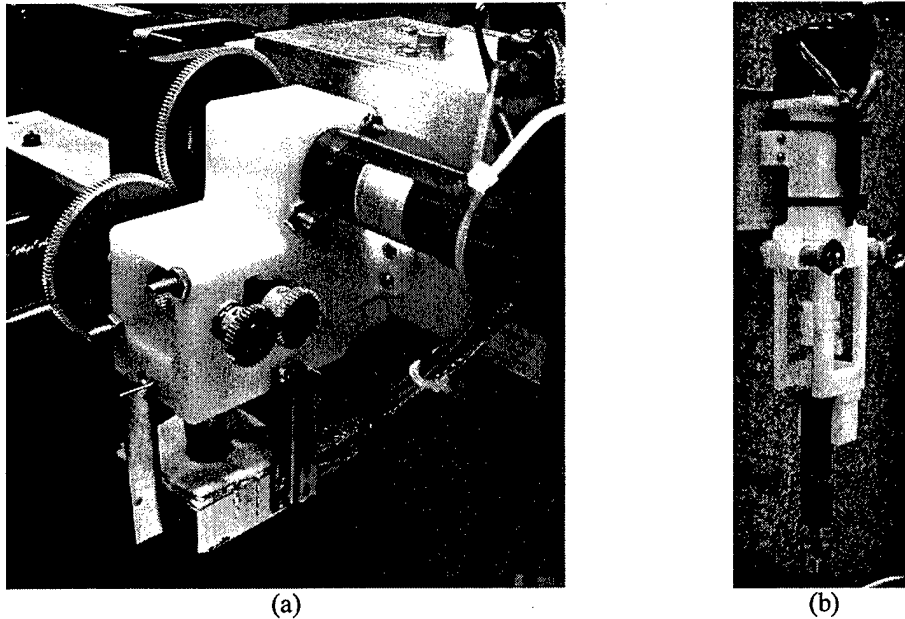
Extrusion tools constructed: (a) wire-fed extruder, and (b) syringe tool
